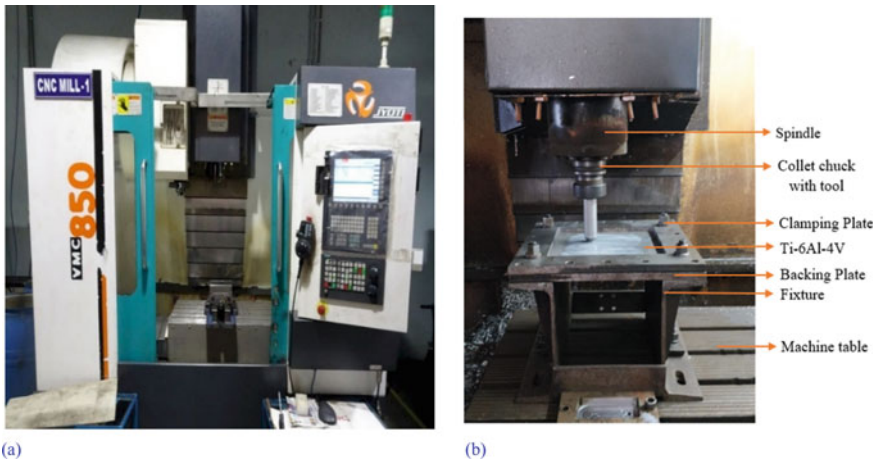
Depiction of the forming setup: CNC table (a) and fixture (b)
